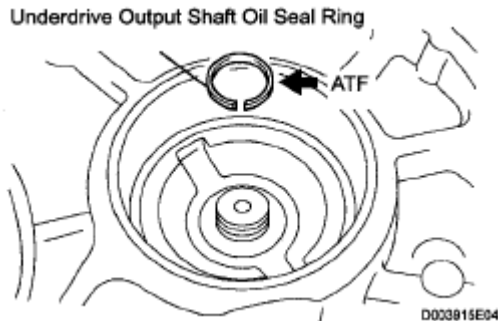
Identifying Underdrive Output Shaft Oil Seal Ring
